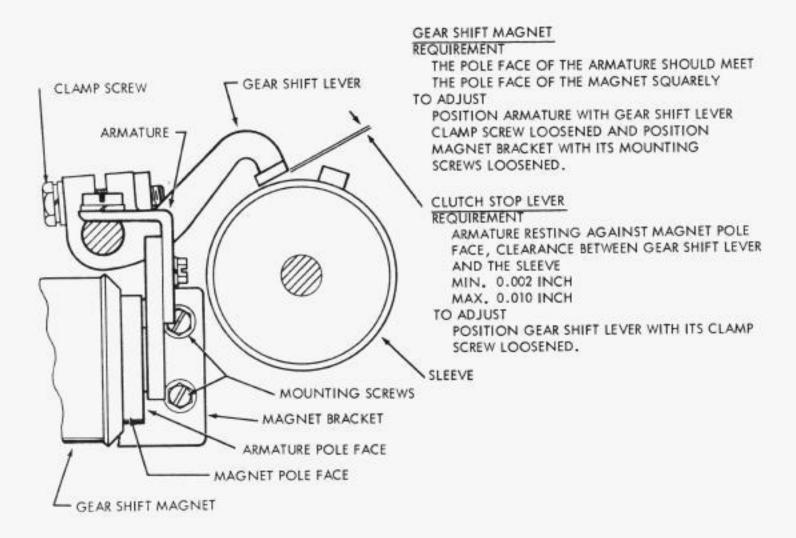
REMOTE CONTROL GEAR SHIFT MECHANISM
